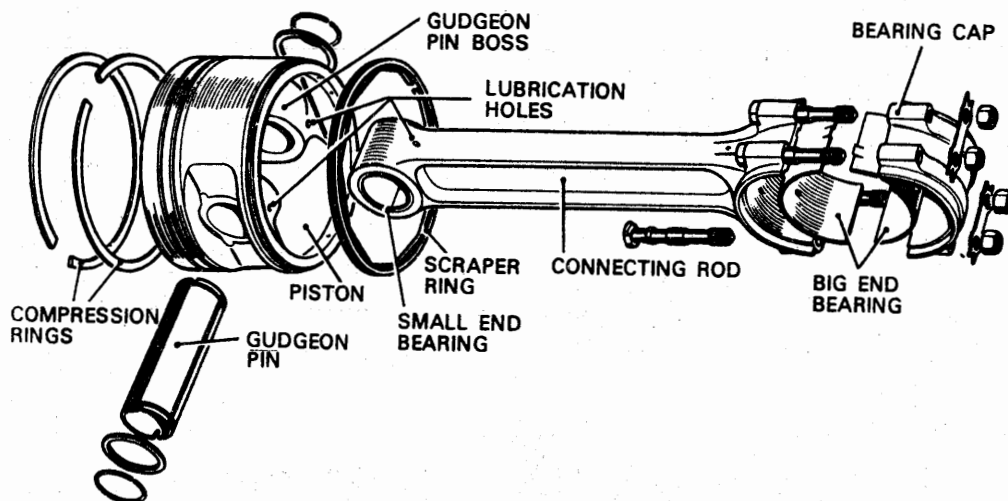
CONNECTING ROD AND PISTON ASSEMBLY
